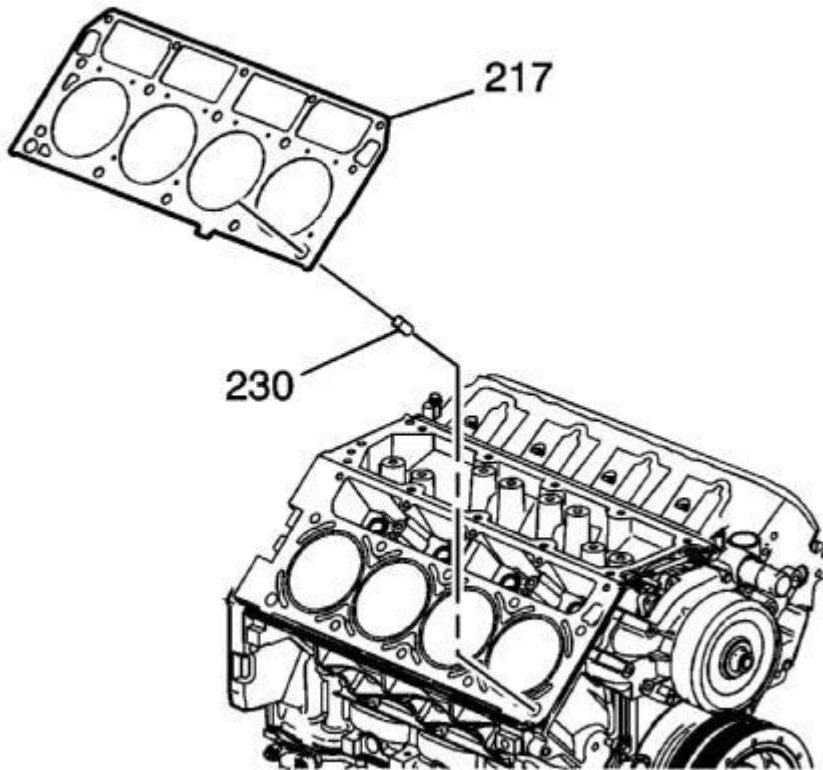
Cylinder Head Gasket & Locating Pins - Right
